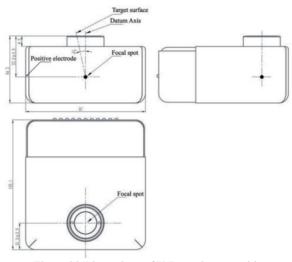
Dimensions of X-Ray tube Assembly 9.2 Electrical Connection Diagram of X-Ray Tube Assembly
